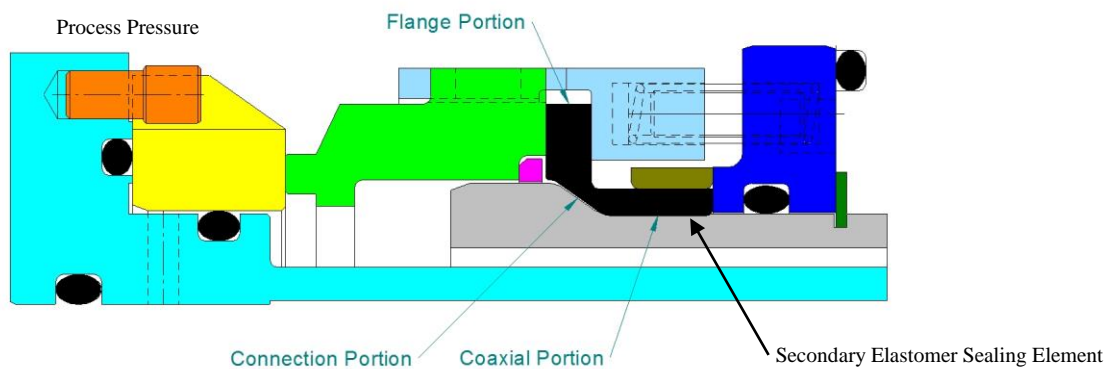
The new flexible elastomer sealing element incorporated in a single non-pusher seal
